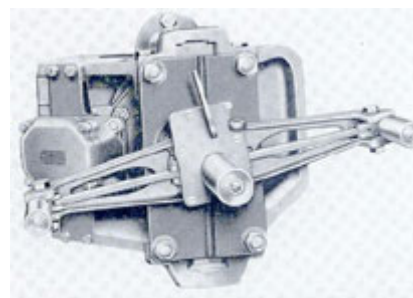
Flood valve operating gear and hydraulic cylinder.
